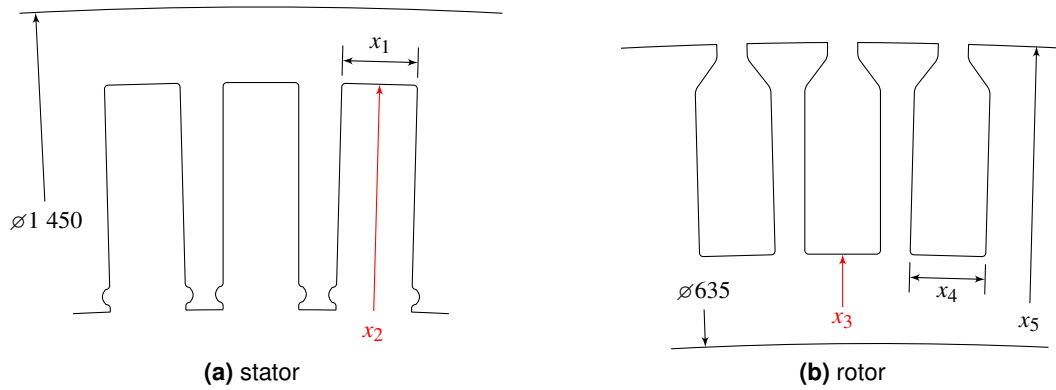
6 MW mill motor adapted design dimension variables to be optimised for the rated performance. Dimensions in mm.
